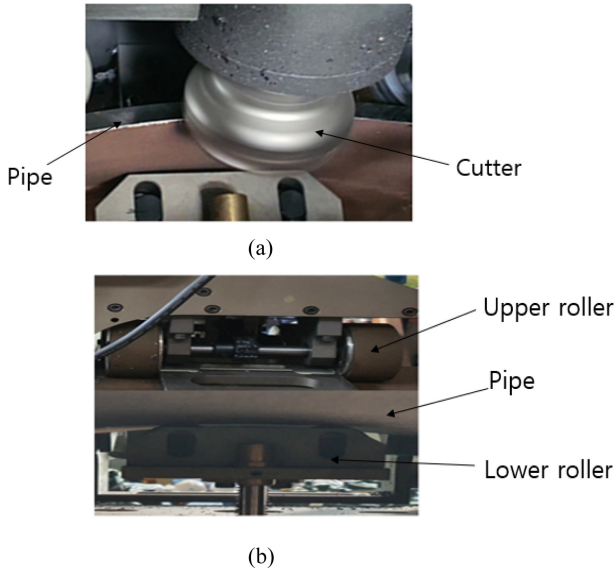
Details of the machining unit and driving unit (a) Contact appearance between beveling tool and pipe, (b) View of the driving unit holding the pipe
